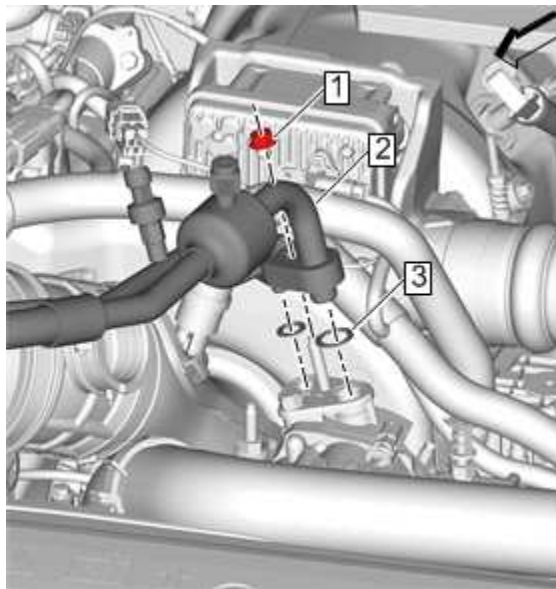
Air Conditioning Compressor Hose, Air Conditioning Compressor And Sealing Washers
